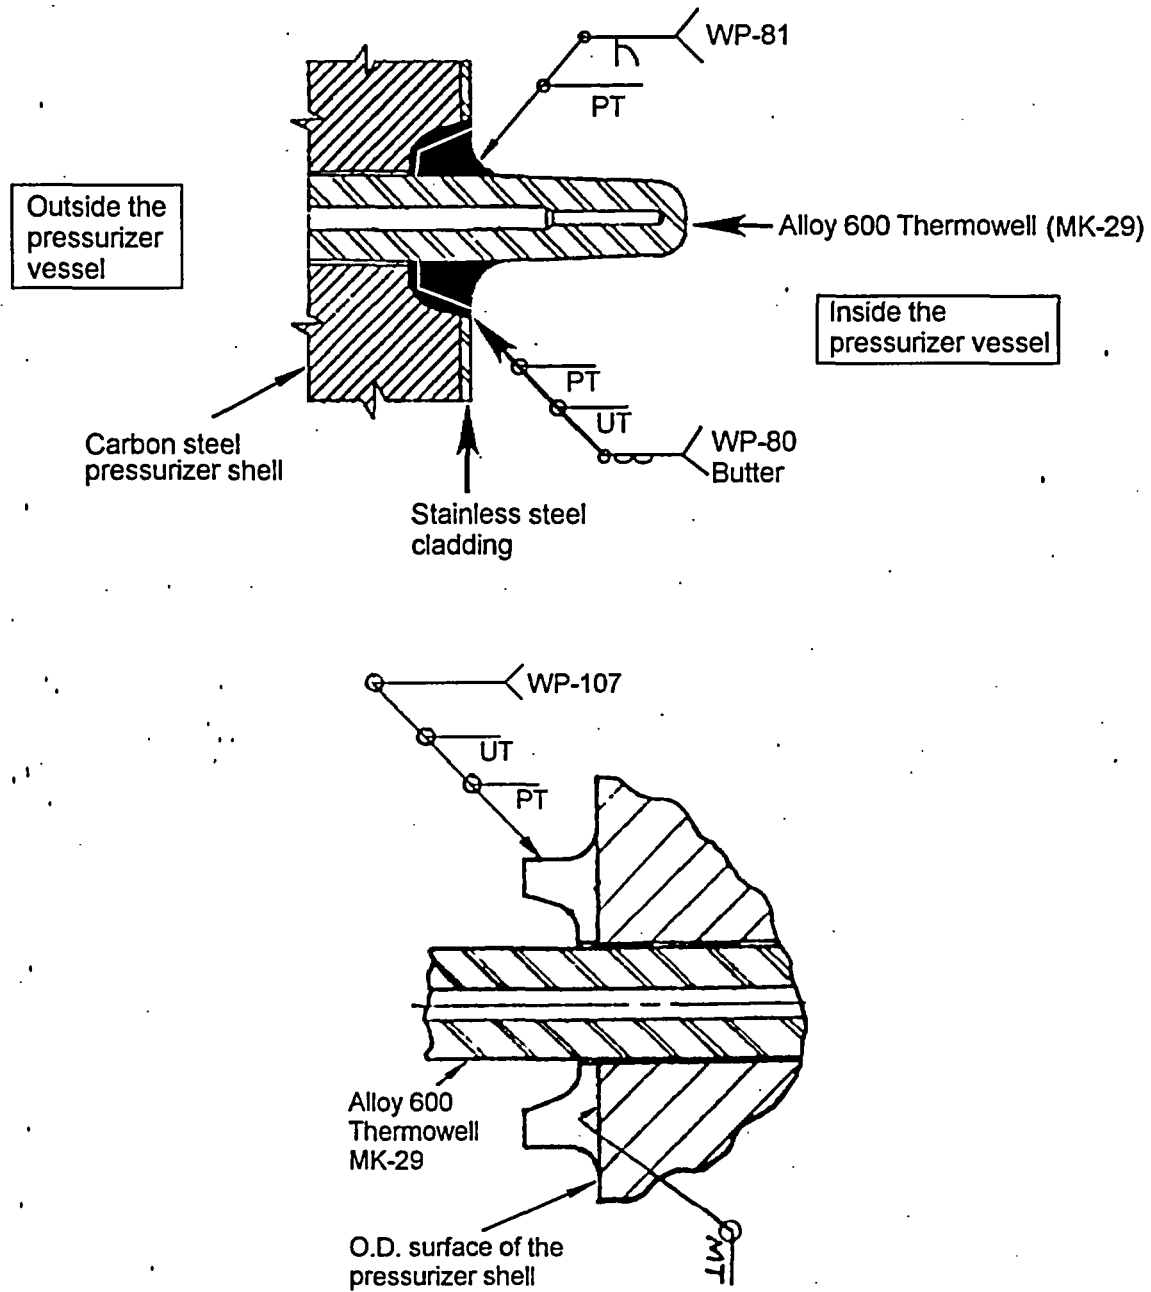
Top, detail of the 1½-inch thermowell nozzle to the pressurizer shell I.D. surface J-groove weld. Bottom, detail of the weld boss (not wetted) to the pressurizer shell O.D. surface. The weld boss was intended for future welding replacement thermowell nozzle if needed.
